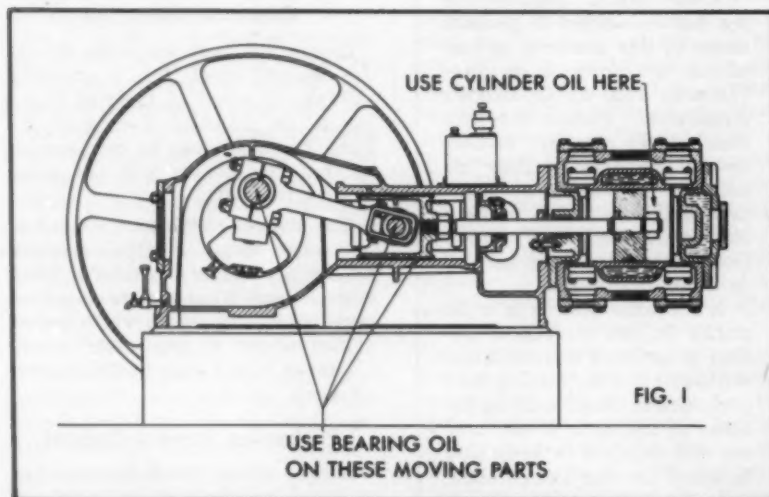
Compressor cylinders require cylinder oil and the running gear, crankcase or bearing oil
